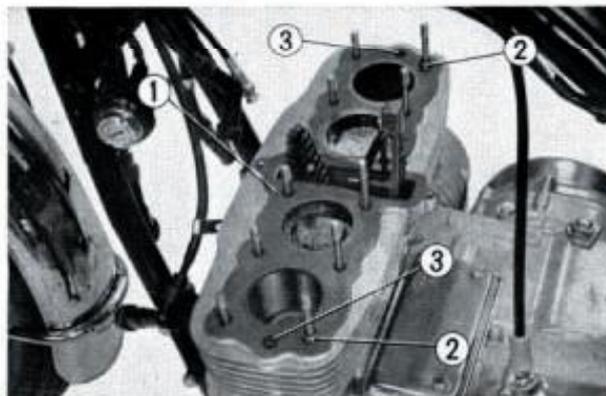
① Cylinder head gasket ② Dowel pins ③ O-rings
